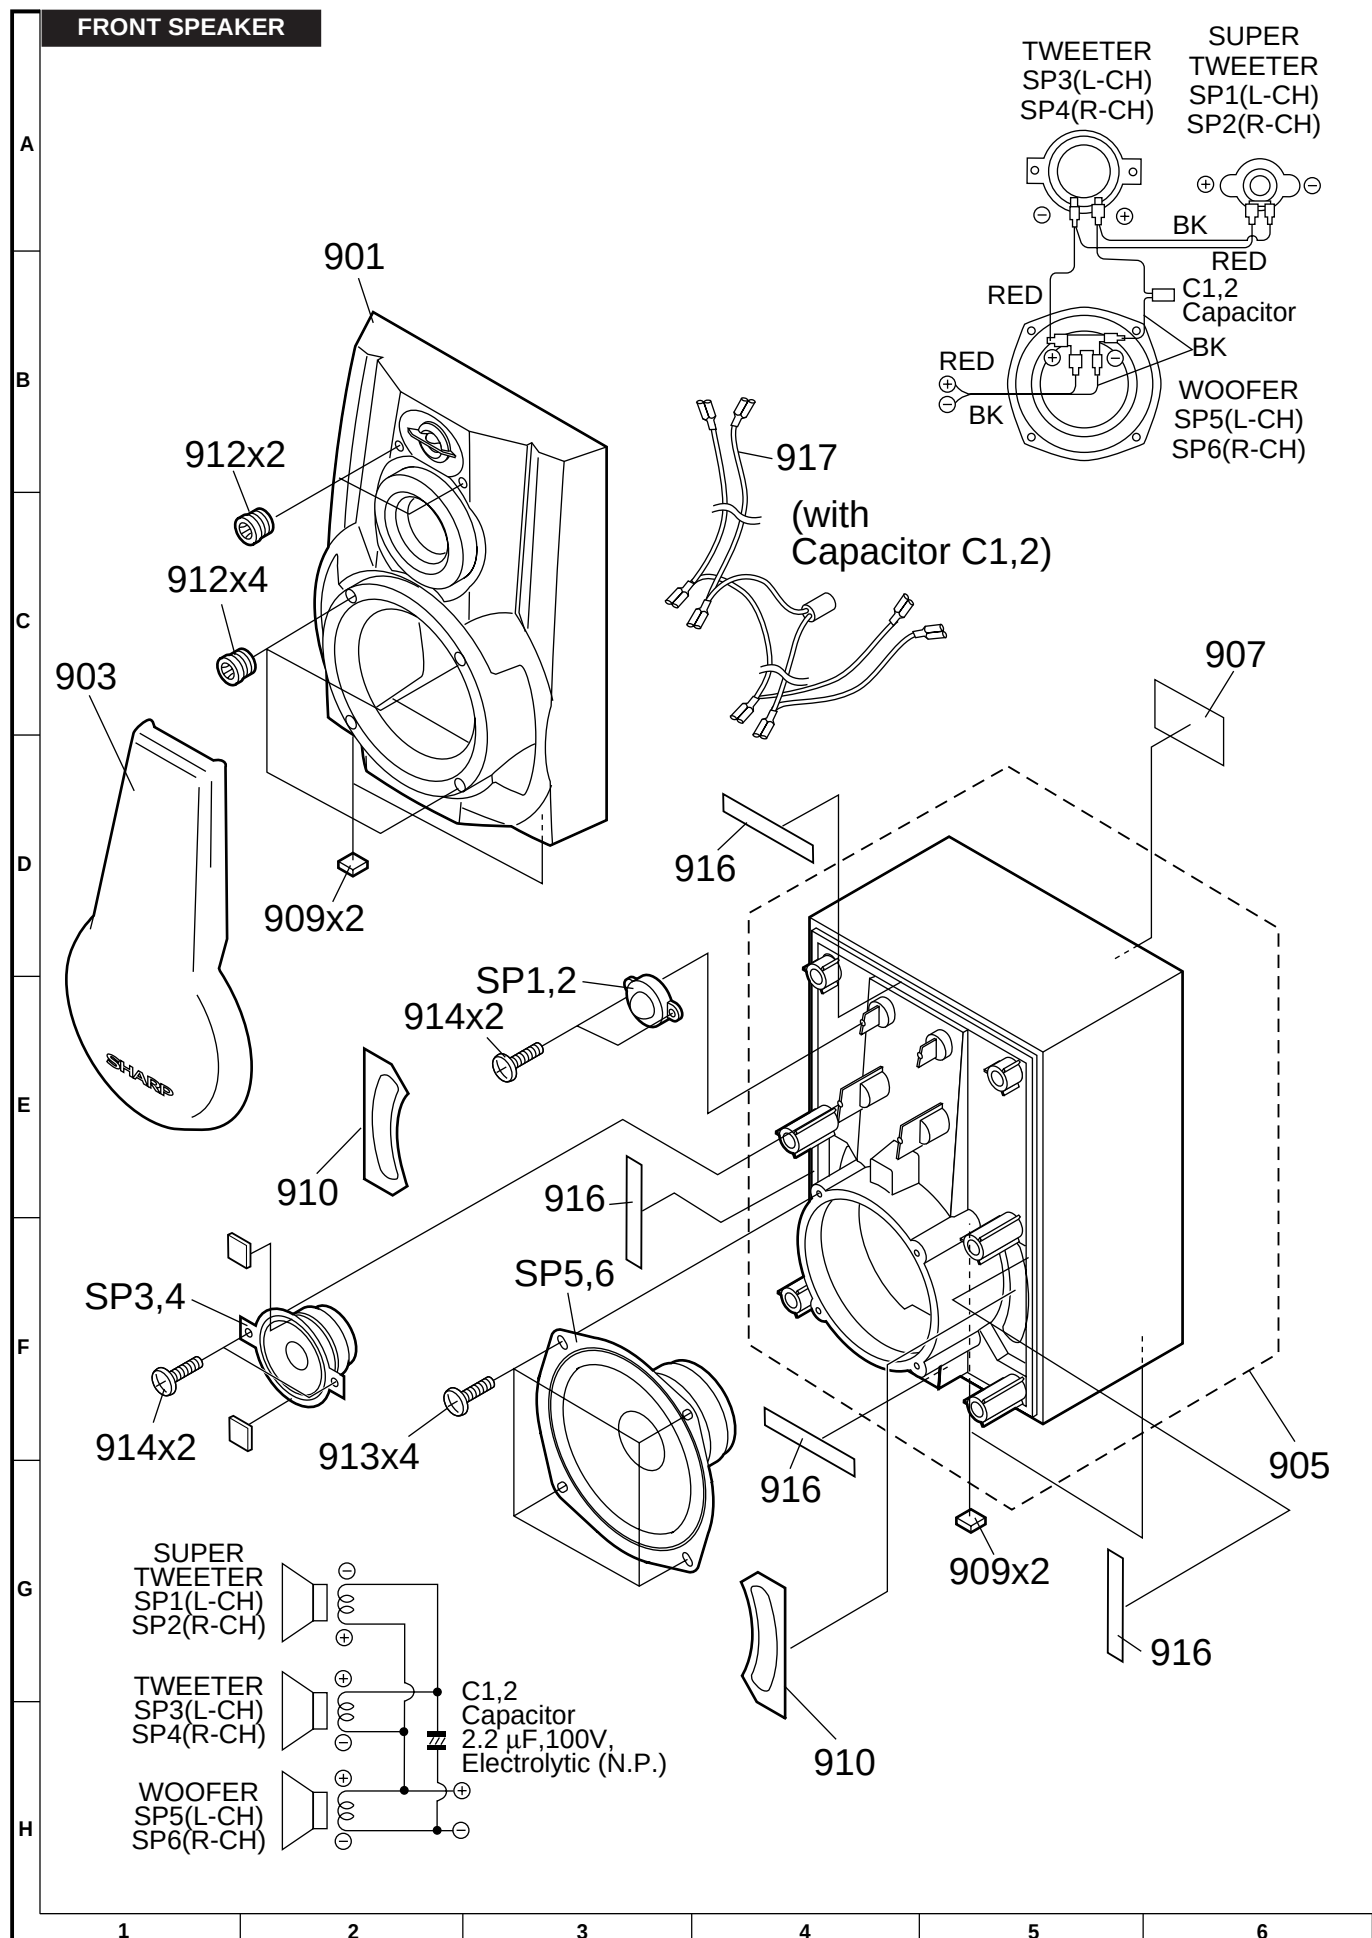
SPEAKER EXPLODED VIEW (1/2)
